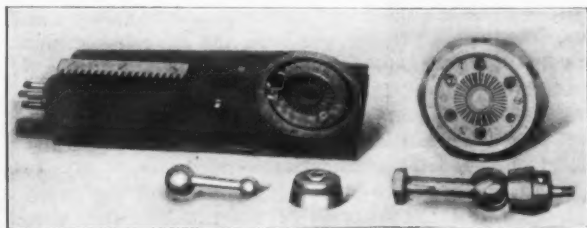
The Turret Head Removed from the Slide, Showing the Hole Through the Center Bolt.
